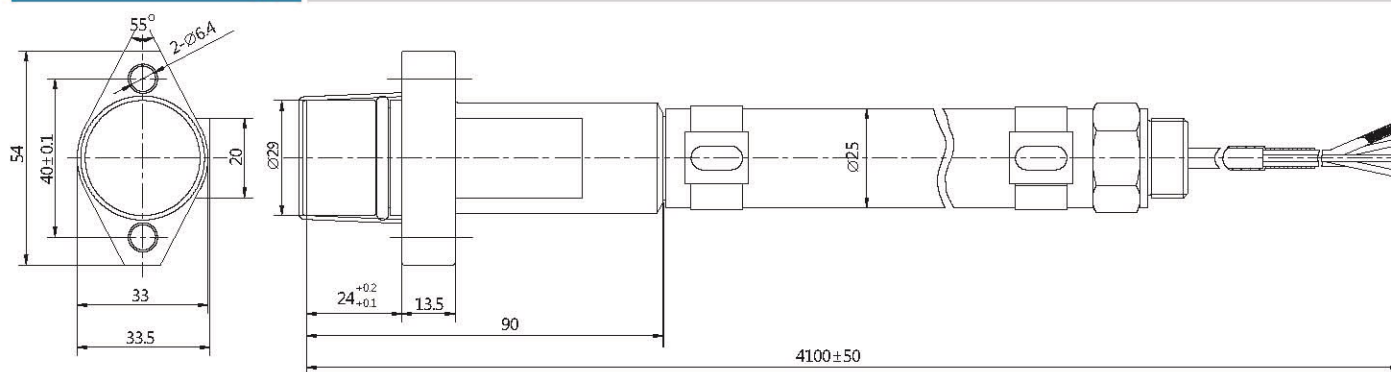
Bolt type TQG19A, TQG19B speed sensor Outline Drawing
